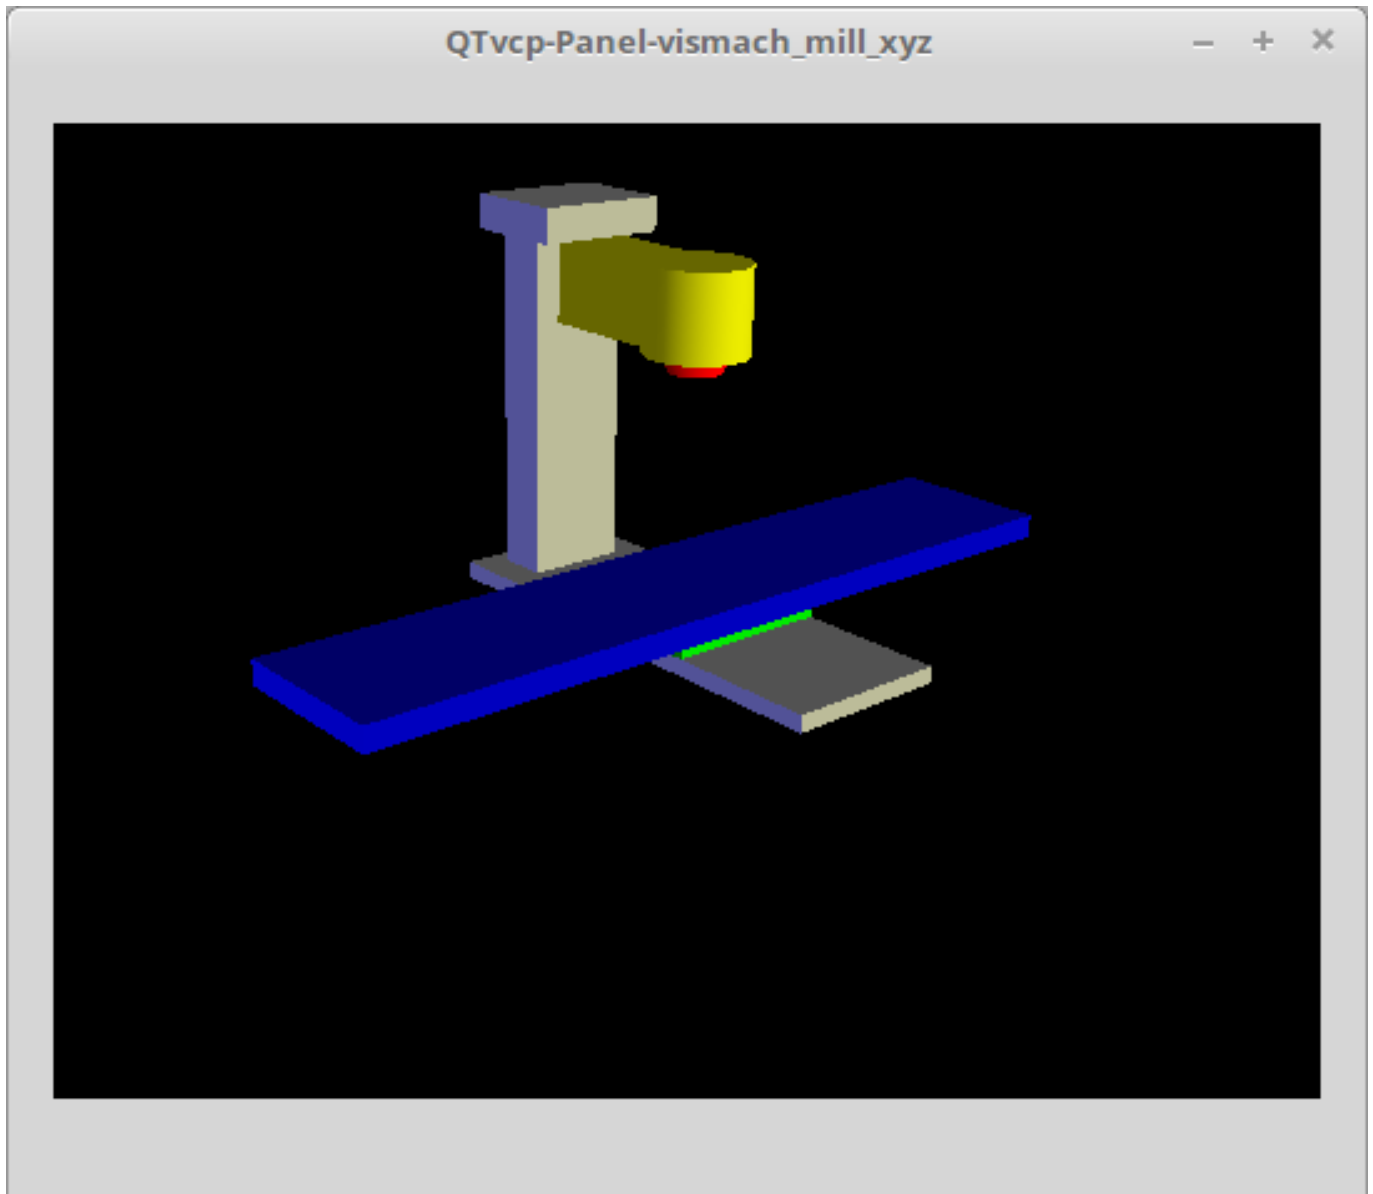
QtVCP vismach_mill_xyz - 3-Axis Mill 3D View Panel
